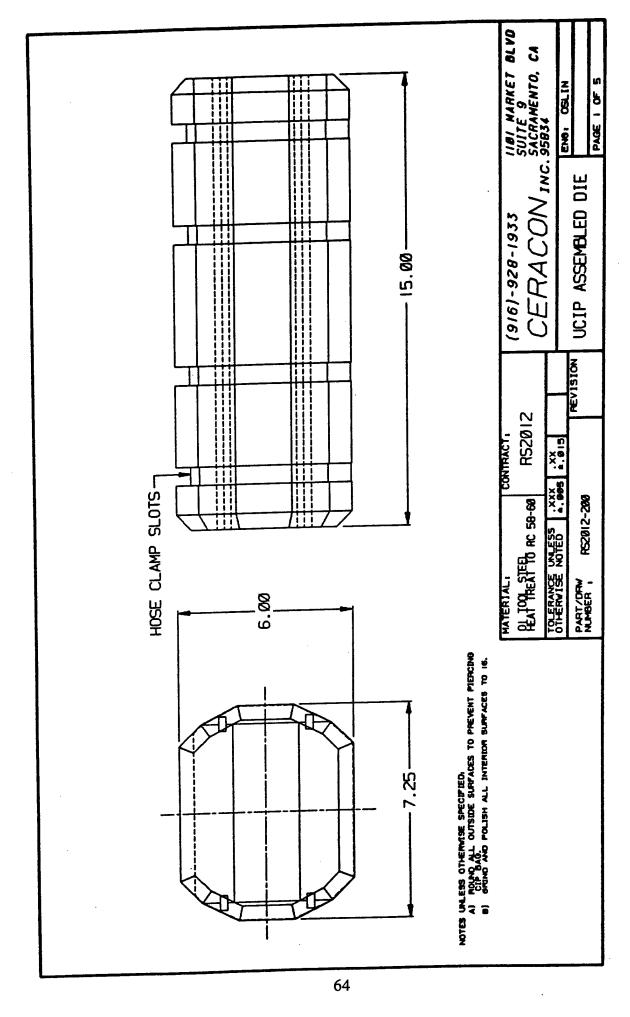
Uniaxial Cold Isostatic Press (UCIP) Assembled Die.
